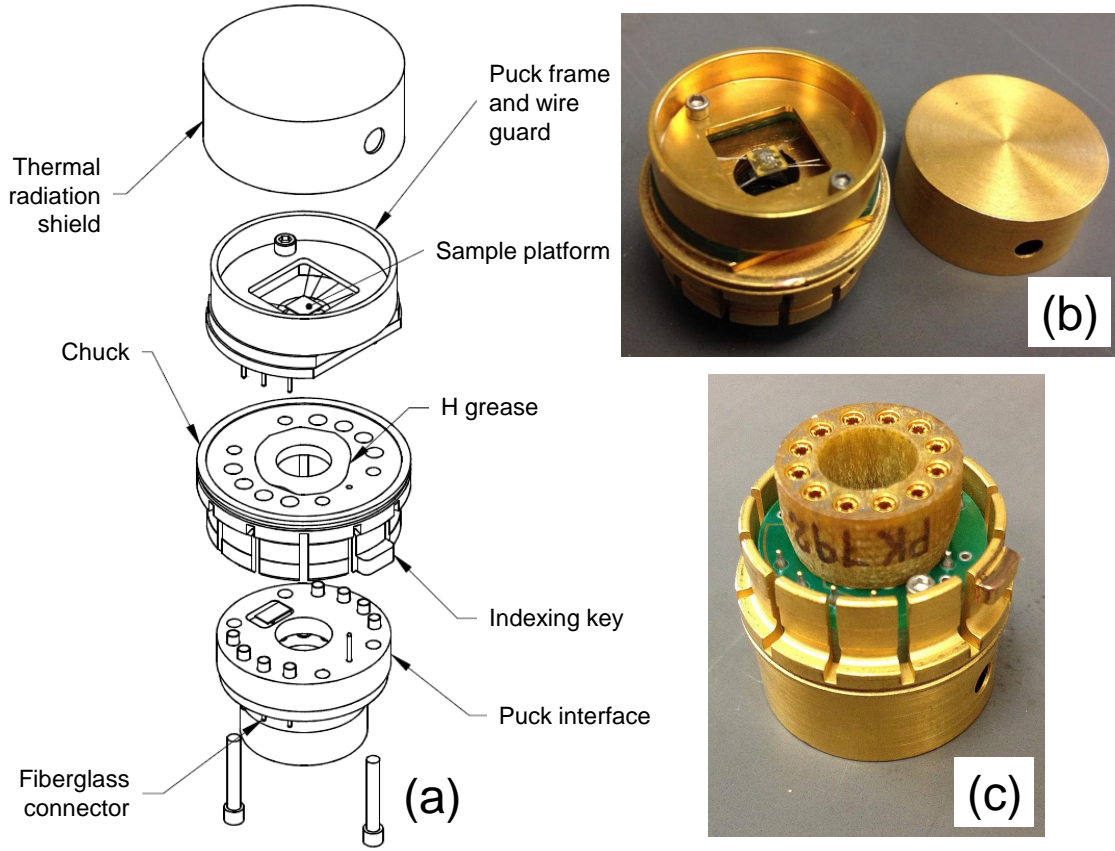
(a) Exploded view of the specific heat puck [236] along with (b) top and (c) bottom perspectives.
